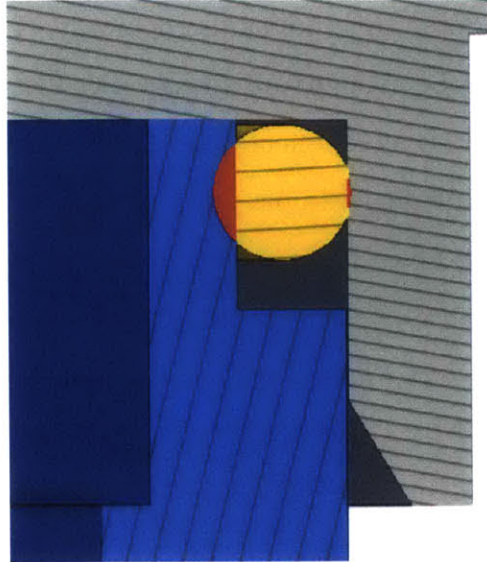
A cross-section of the O-ring groove for sealing the motor housing. The O-ring is in yellow, the motor housing in blue, and the front plate in grey.
